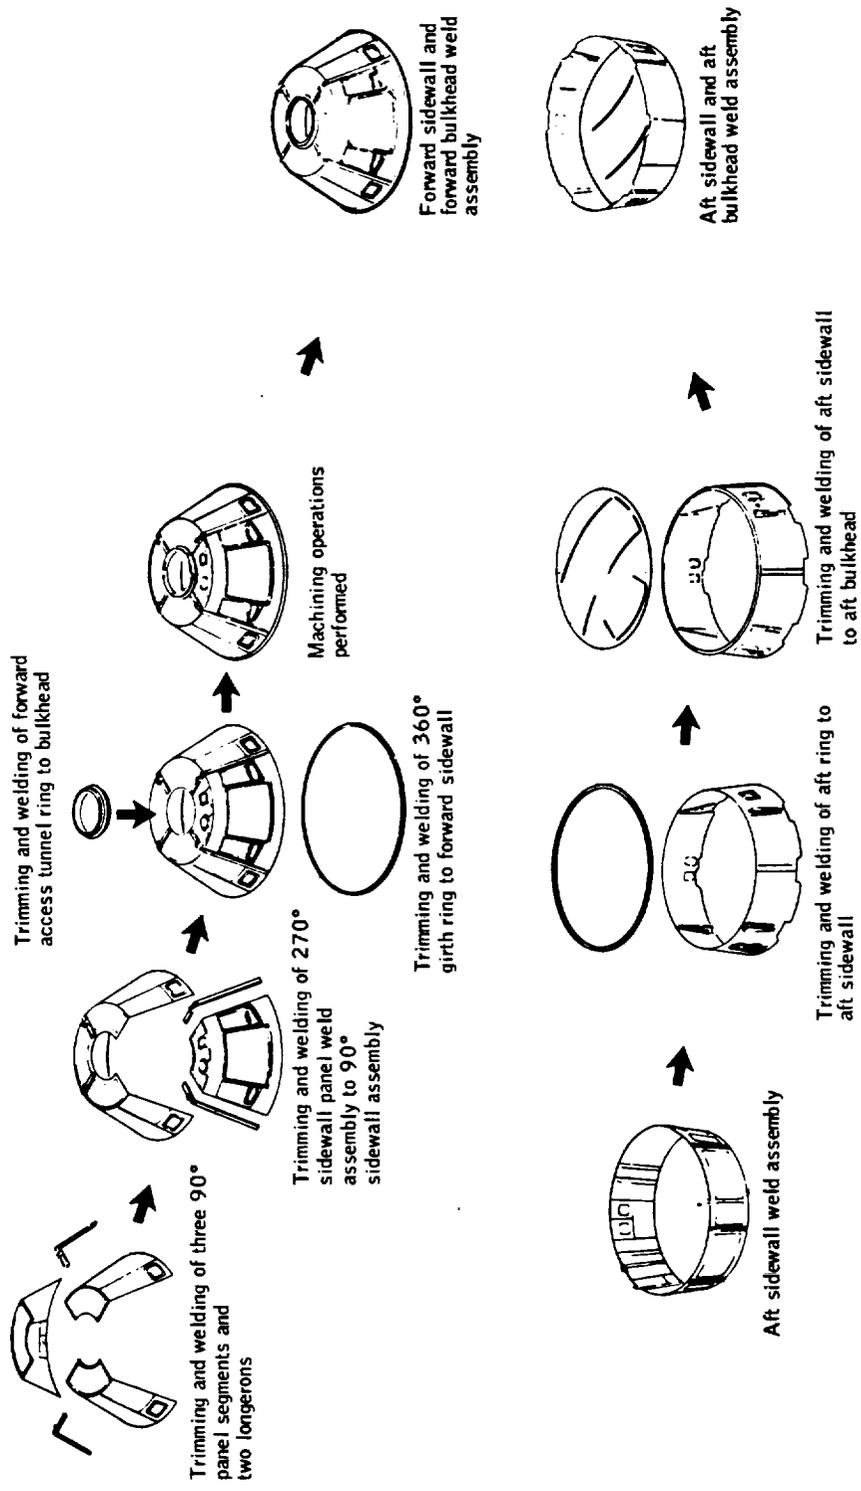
Command module crew compartment structure inner shell assembly flow.
